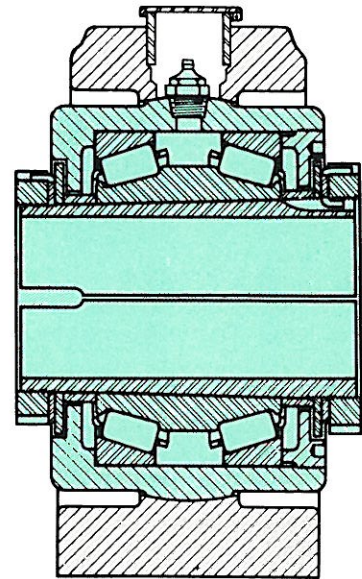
Section through a Non-Expansion Type Pillow Block with a Spherical Bore in the cap and base. This adaptor design with a backing off nut is used for the bearings with a shaft diameter of 3¹⁵/₁₆" to 9" inclusive.
